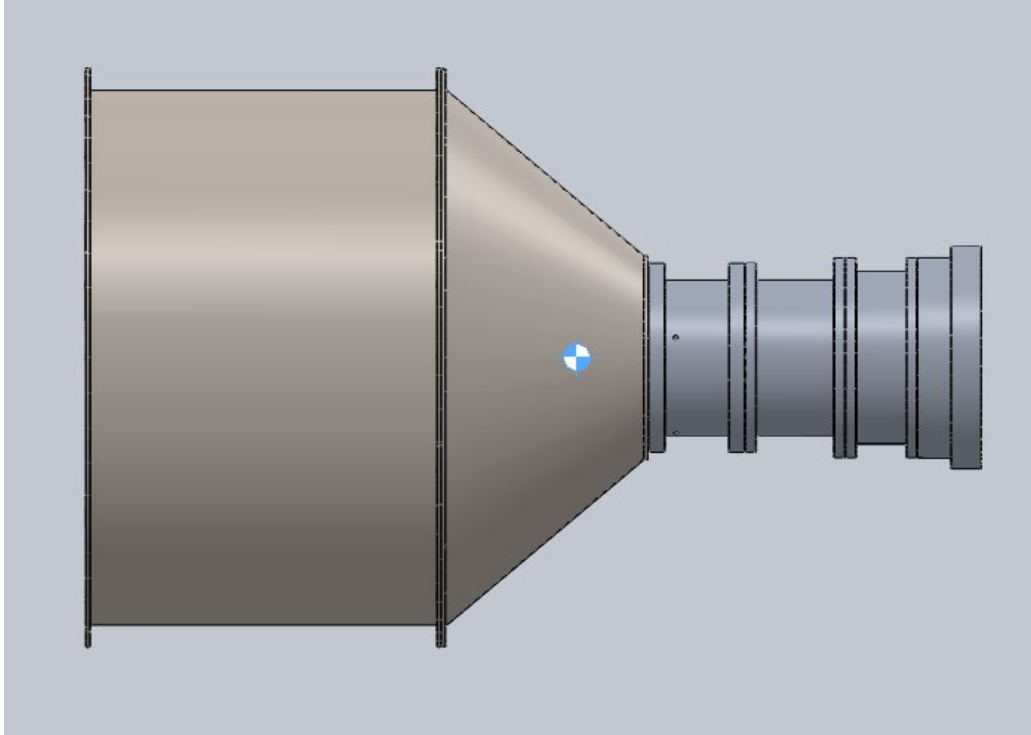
Assembly of throttle casing, cone attachment and bell mouth as designed by Wallen. Source: [4].
